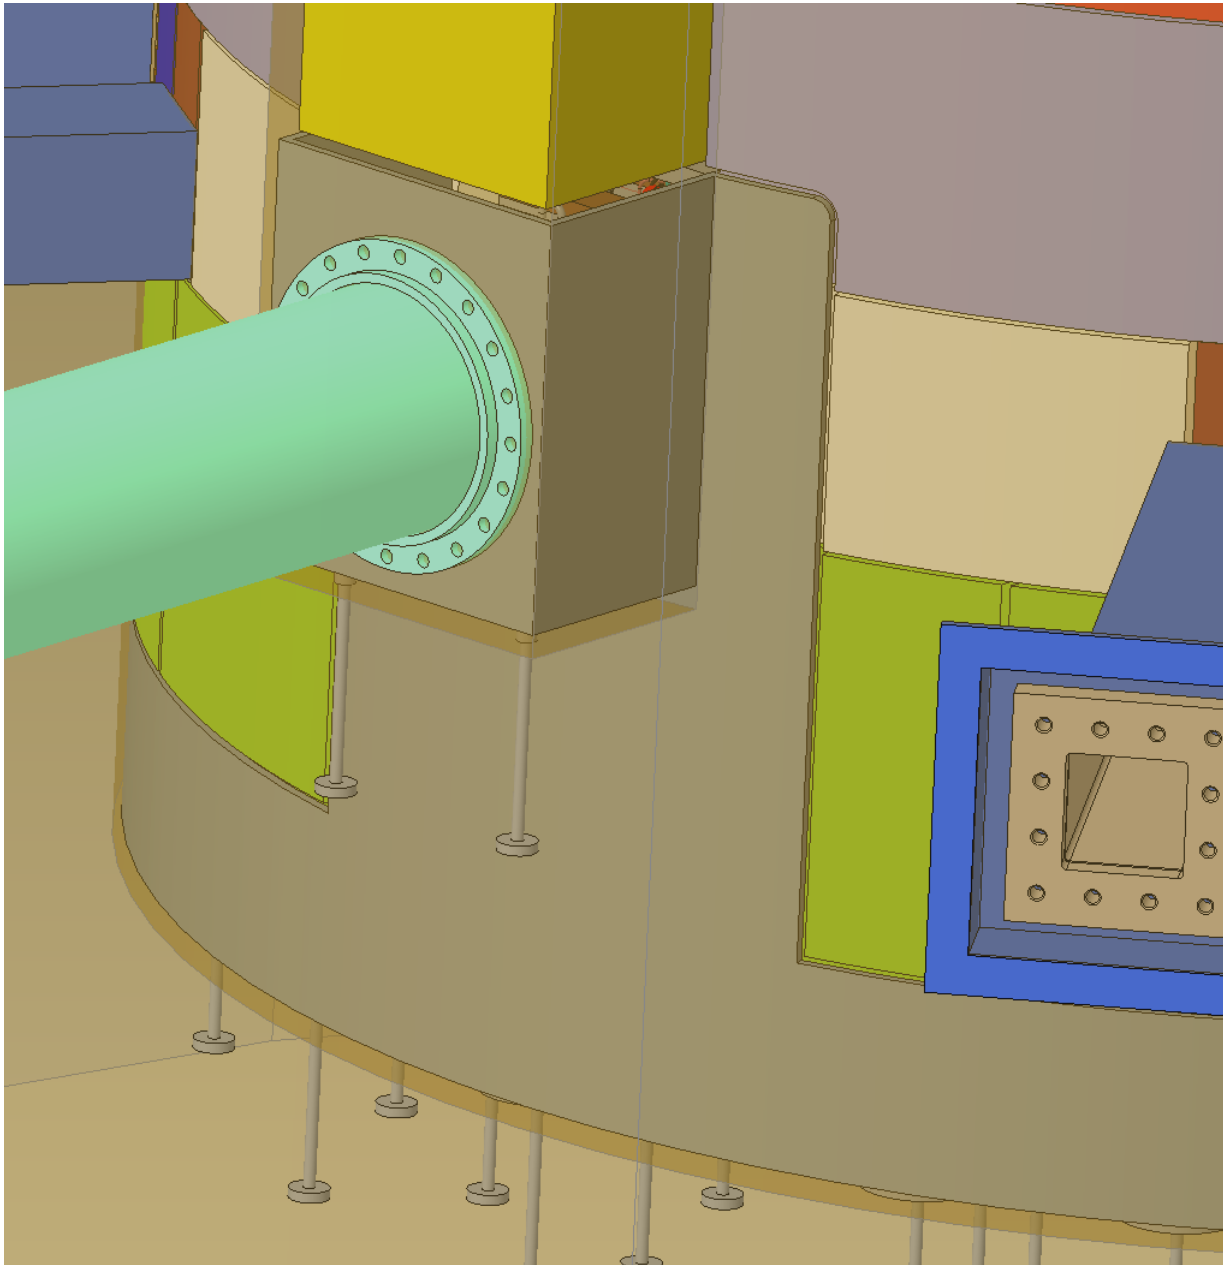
Exterior view of bulk shielding liner proton beam window bump-out
